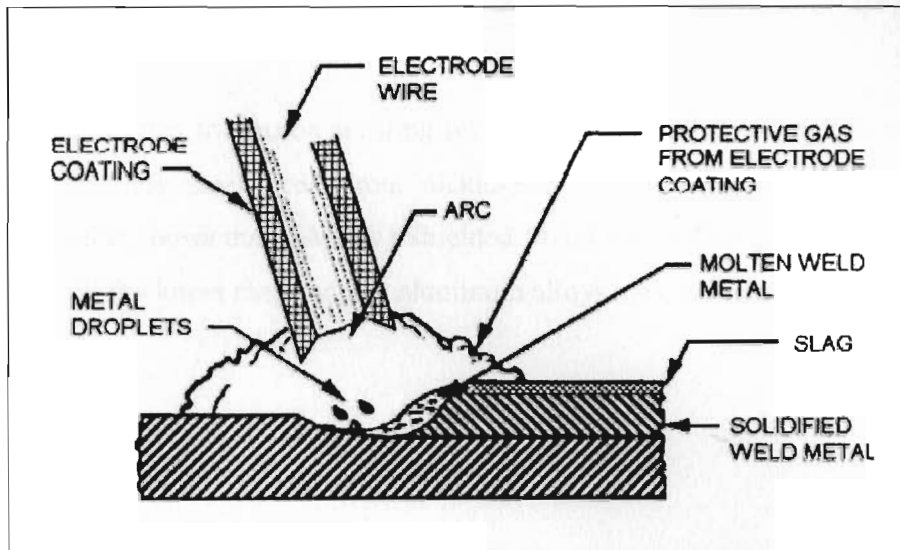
1: Shielded Metal Arc Welding (SMAW) (Jeffus, 2004)
